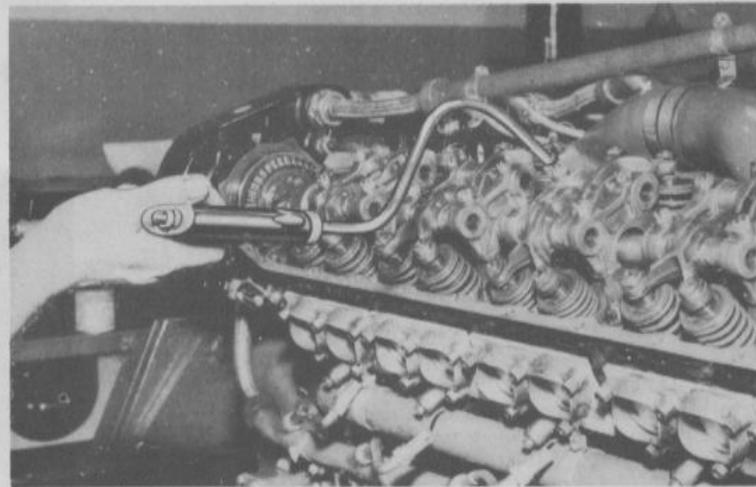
B - Spray Camshaft and Valve Mechanism With Corrosion-Preventive Mixture
